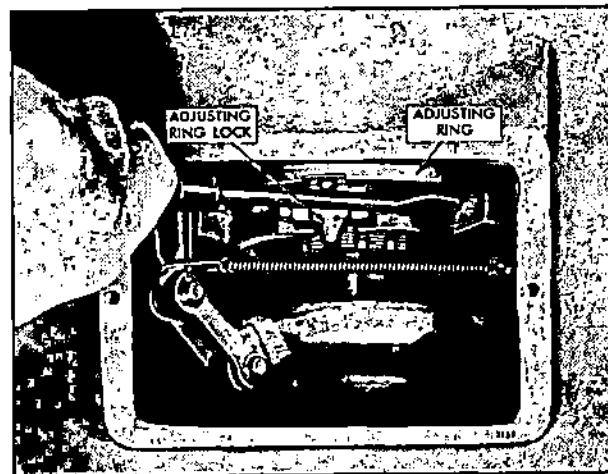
Power Take-Off Assembly Showing 14" Diameter Clutch Adjustment Ring
